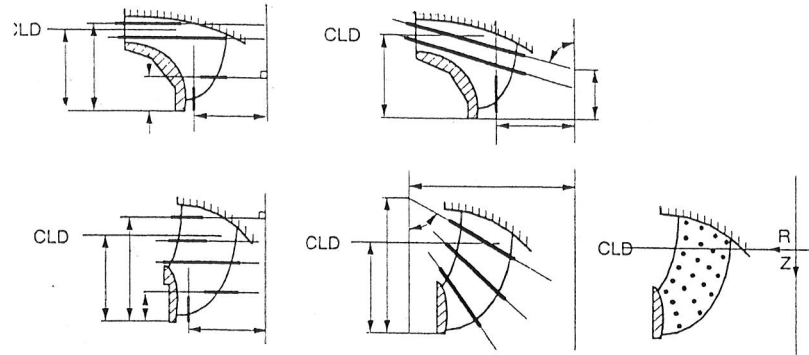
Example of the dimensions to be checked on the runner/impeller of a radial flow machine
